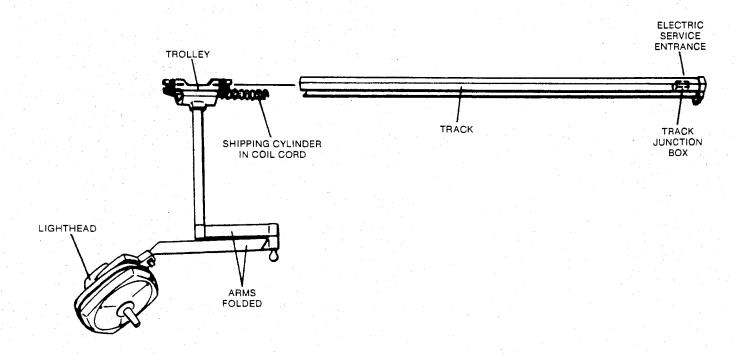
, INSTALL TROLLEY AND LIGHTHEAD
